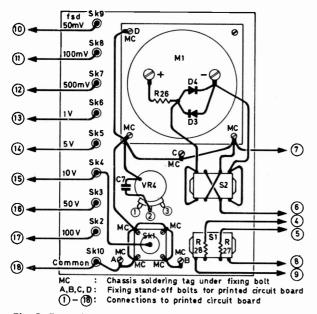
Rear view of the front panel assembly. The panel is approximately 4 × 6 in.
